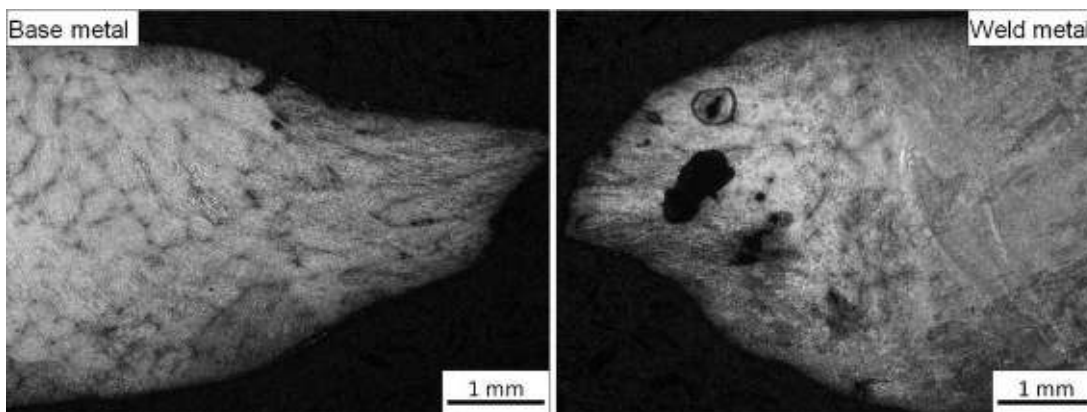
Fracture location of cross-weld specimen 120 MPa, 1,492 h
